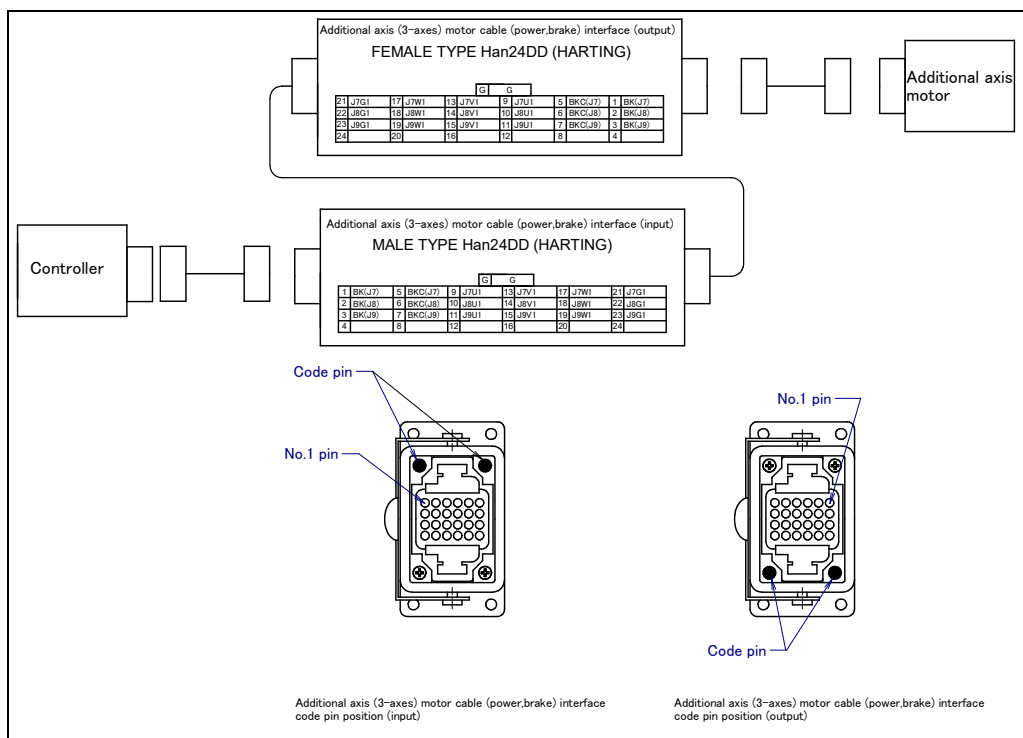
(r) Pin layout of the additional axis (3-axes) motor cable (power and brake cables) interface and layout position of the code pin (option)
